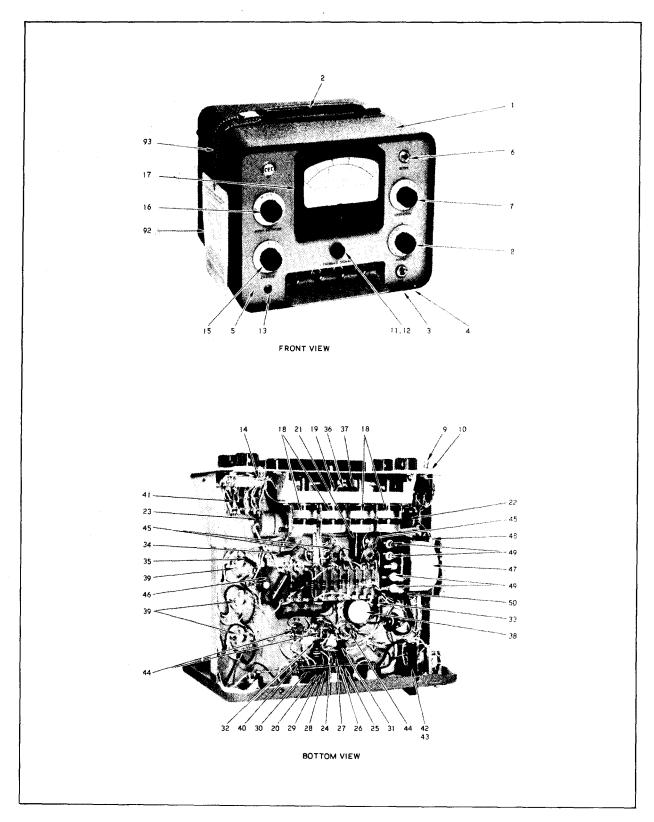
Vibration Meter Type 1-117-0105, Location of Parts (Sheet 1 of 2)
